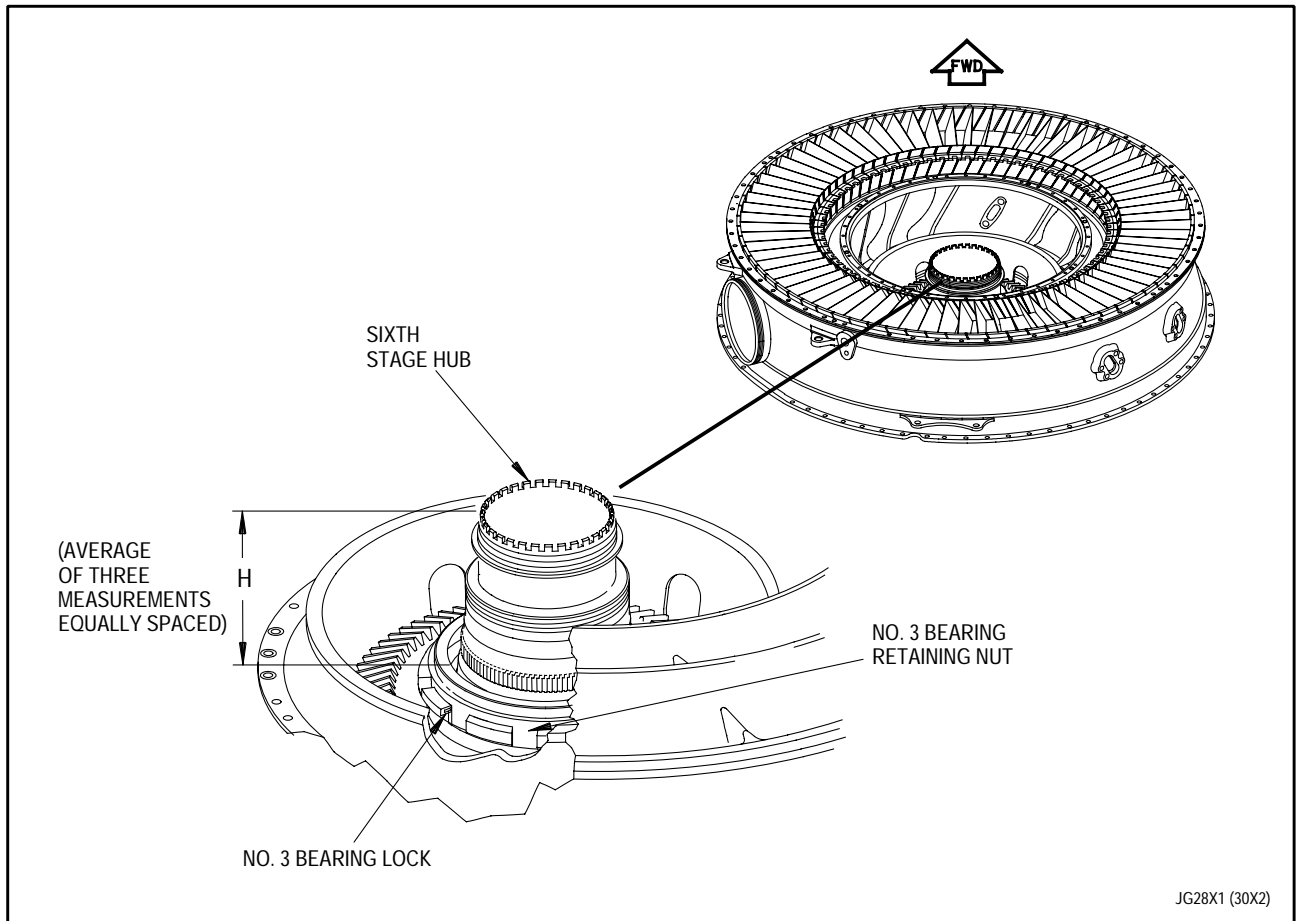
No. 3 Bearing Package - Final Seating Measurement After Installation of No. 3 Bearing Retaining Nut
